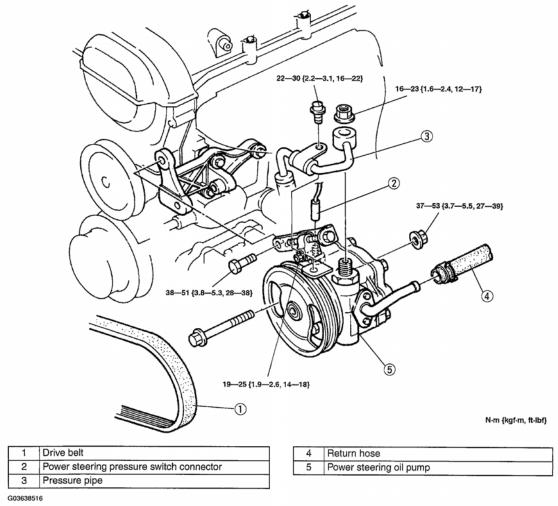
Removing Power Steering Oil Pump - With Torque Specifications
